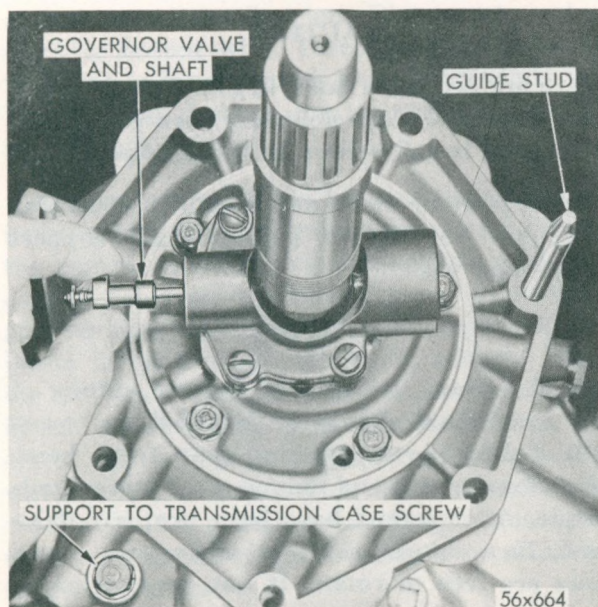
Removal and Installation of Governor Valve Shaft and Valve
